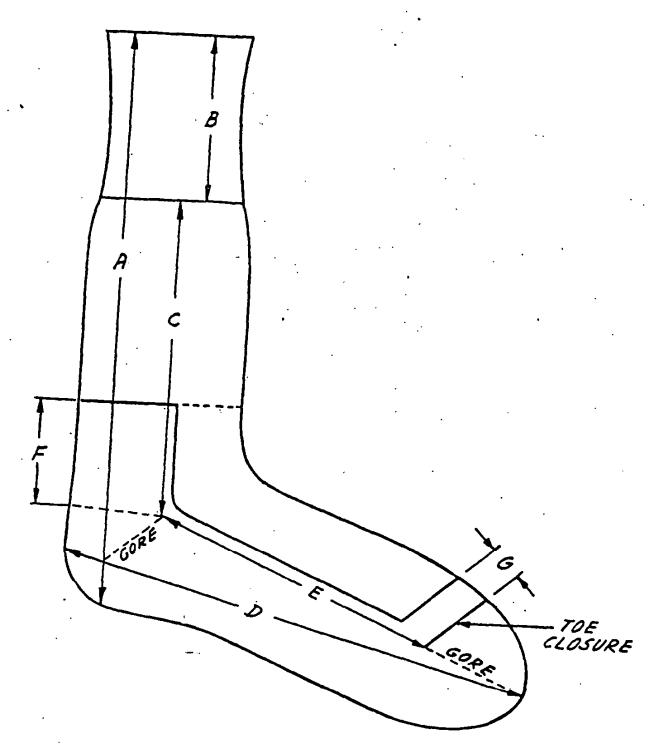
SOCKS, MEN'S, CUSHION SOLE, STRETCH TYPE
